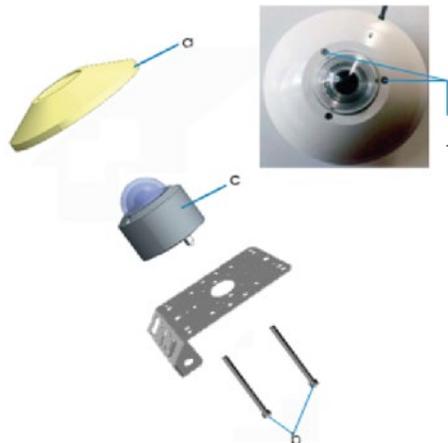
Pyranometer on mounting device with screws, b, inserted from below
